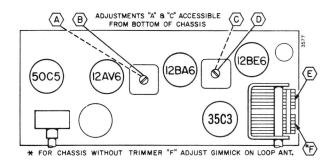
Top View of Chassis Showing Tube and Alignment Points Locations.
